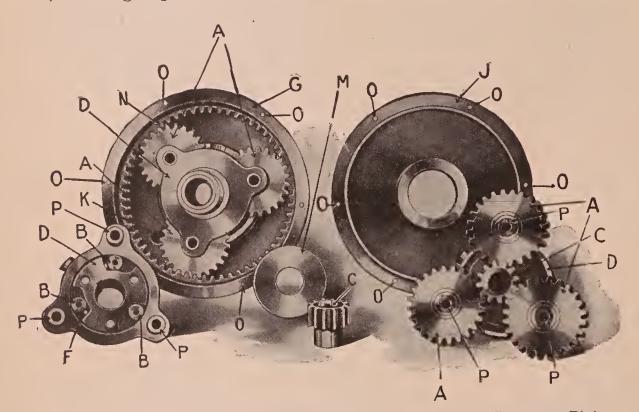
Exploded View of Planetary Gear Transmission. A—Planetary Pinion; B—Rolling Pawl; C—Center Pinion; D—Planetary Hub; E—Pawl Seat; F—Pawl Plunger; G—Internal Gear; H—Inside End Plate; J—Outside End Plate; K— Oil Plug; M—Sheet Steel Disc
